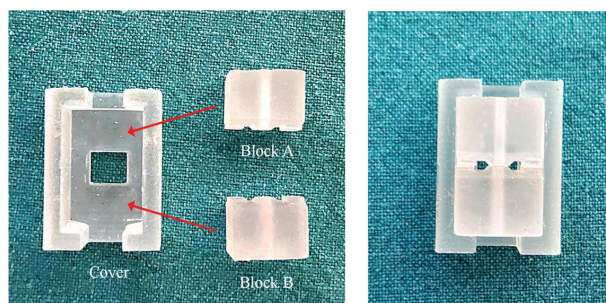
3D-printed resin block and cover. (Left) Disassembled components, with arrows indicating the insertion of Block A and Block B into the cover. (Right) Assembled unit, showing the cover stabilizing and aligning the blocks for specimen preparation and testing.
